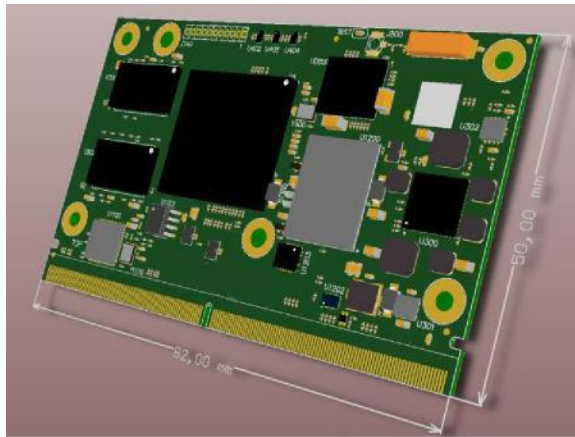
MitySOM-iMX6 Main Outline Dimensions
